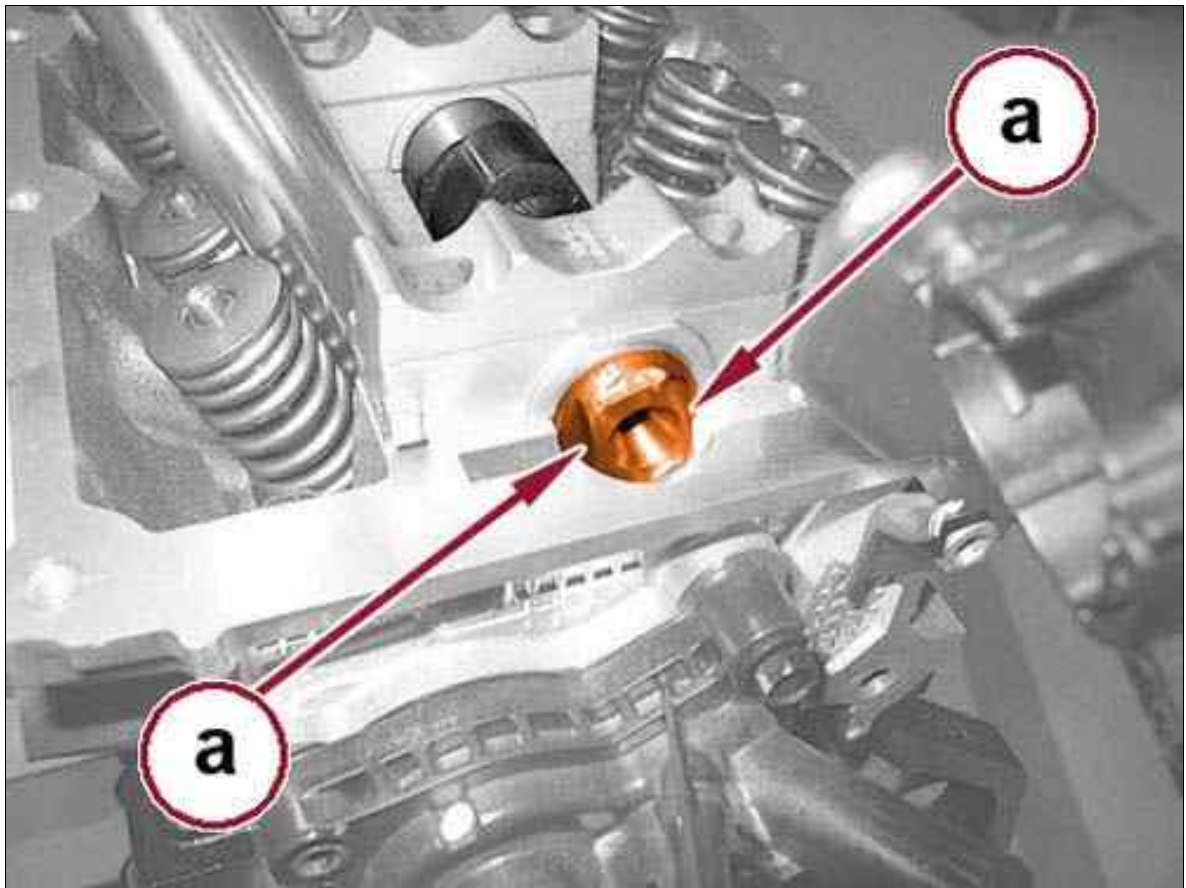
Placing Camshaft Caps & Camshaft In Housing And Positioning Camshaft So That 2 Pins Of Timing Side Stem Are Vertical And Face Exhaust Side
